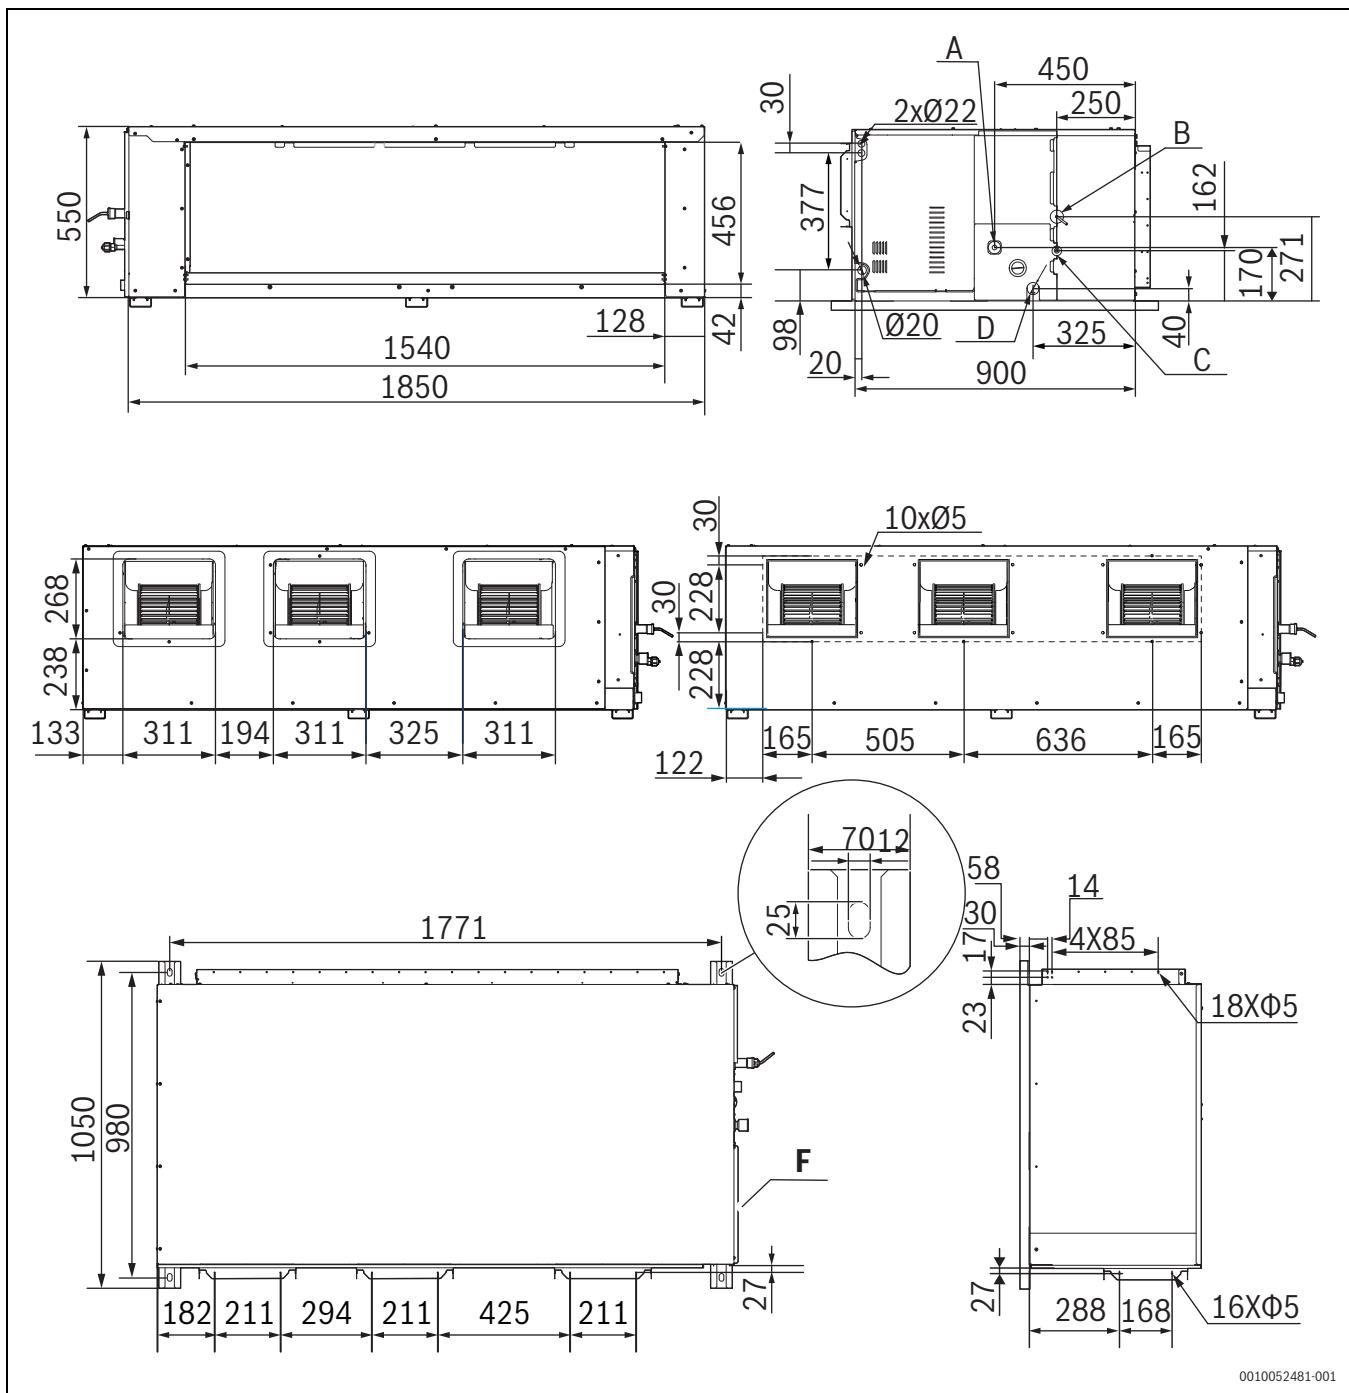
External dimensions and size of air outlet opening (AF2-DH 400-1 - AF2-DH 560-1) (unit: mm)
